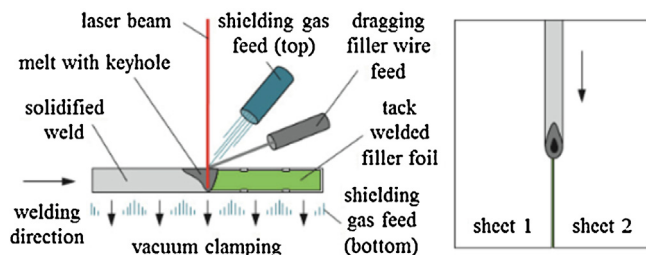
Laser beam welding with filler wire and filler foil [69].
